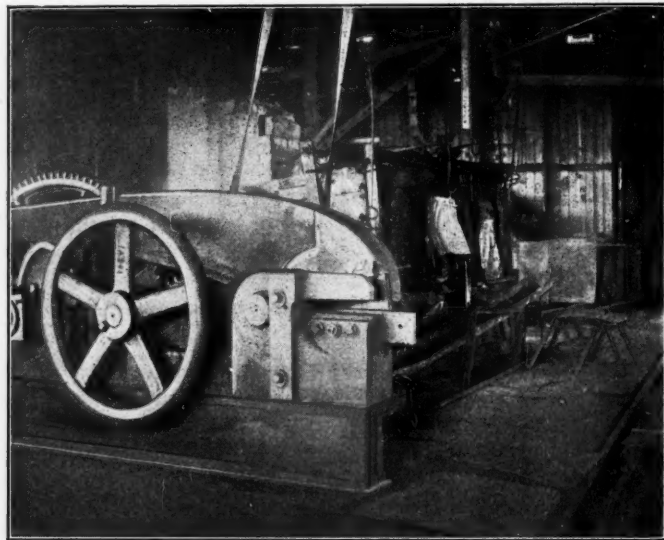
Oil Furnace and Shears Used With Rolling Mill.
